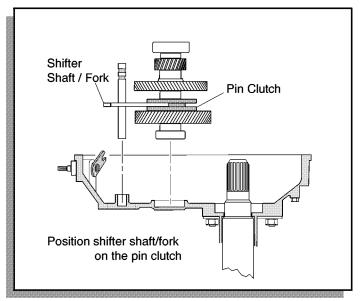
Shifter Fork and Pin Clutch Assembly
